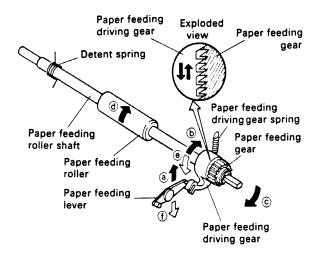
Operation of the Paper Feeding Driving Gear and Paper Feeding Gear
